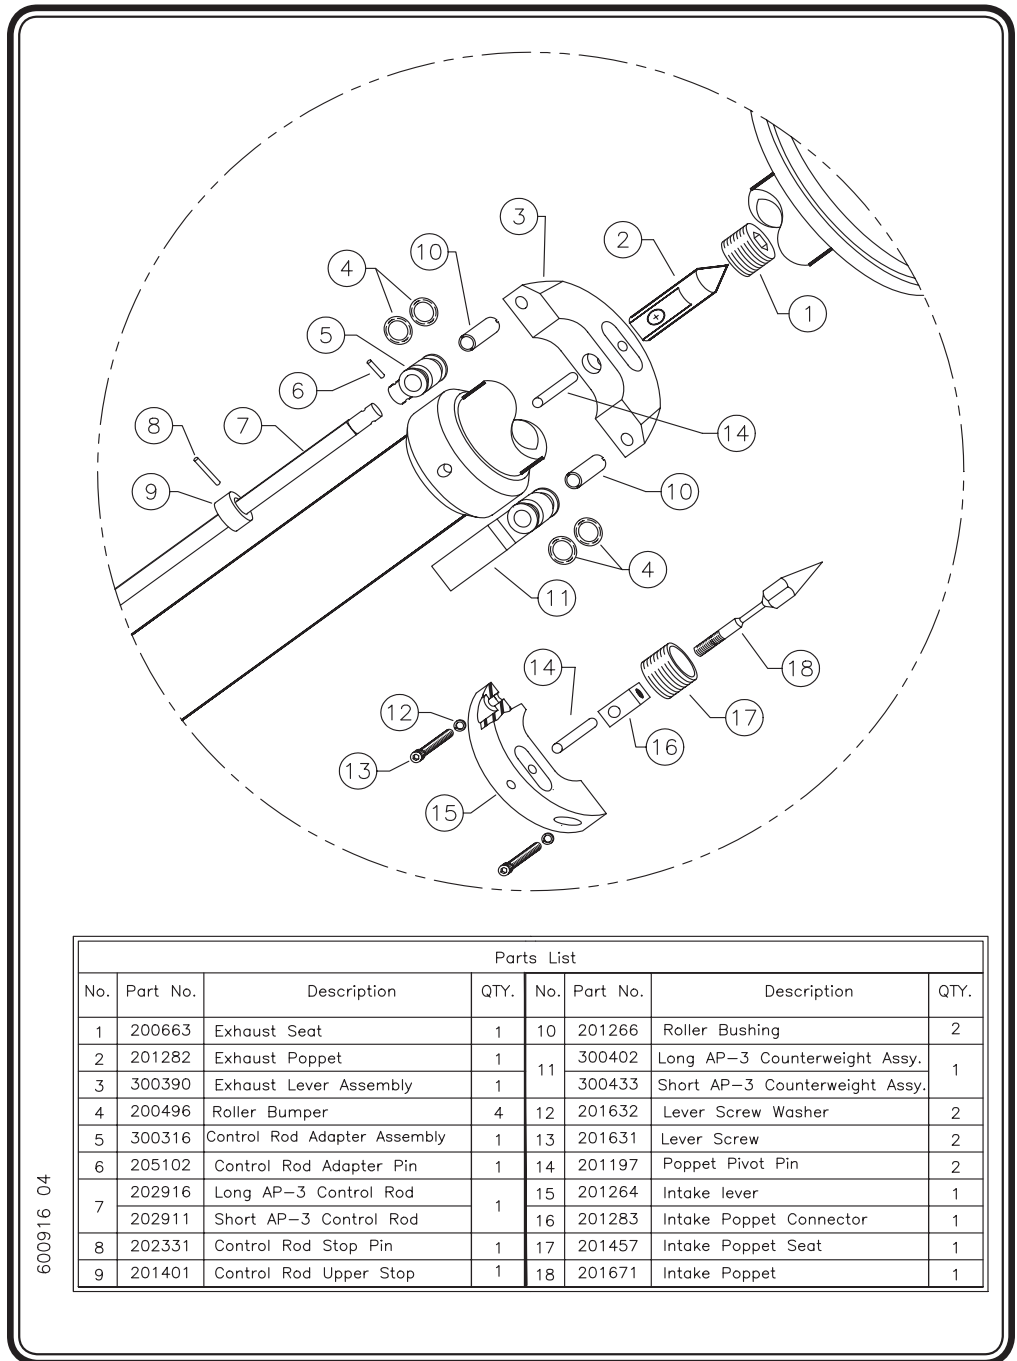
Exploded View of a Bottom-Loading (Long & Short)
